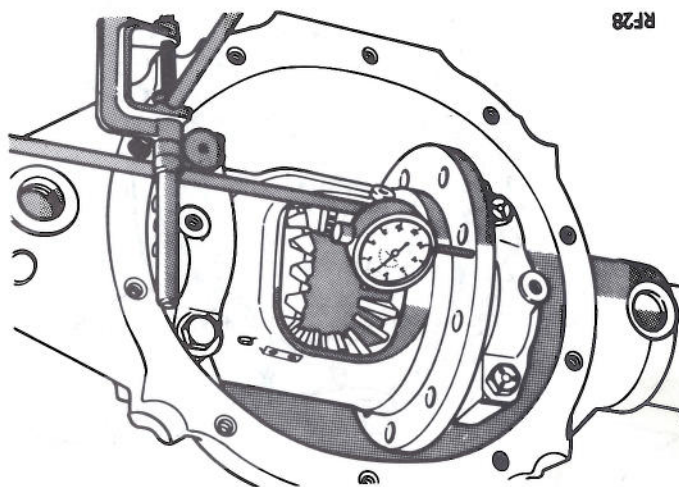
Checking Drive Gear Mounting Flange Face Runout (Typical)
